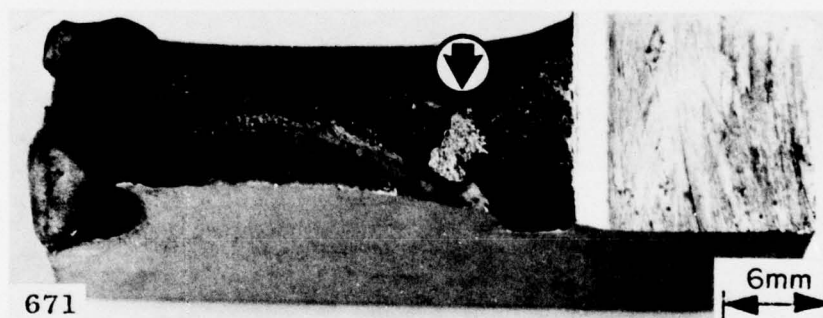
Hydrogen flake on fracture surface of LB weld in 12.7-mm-thick HY-130 DT specimen
